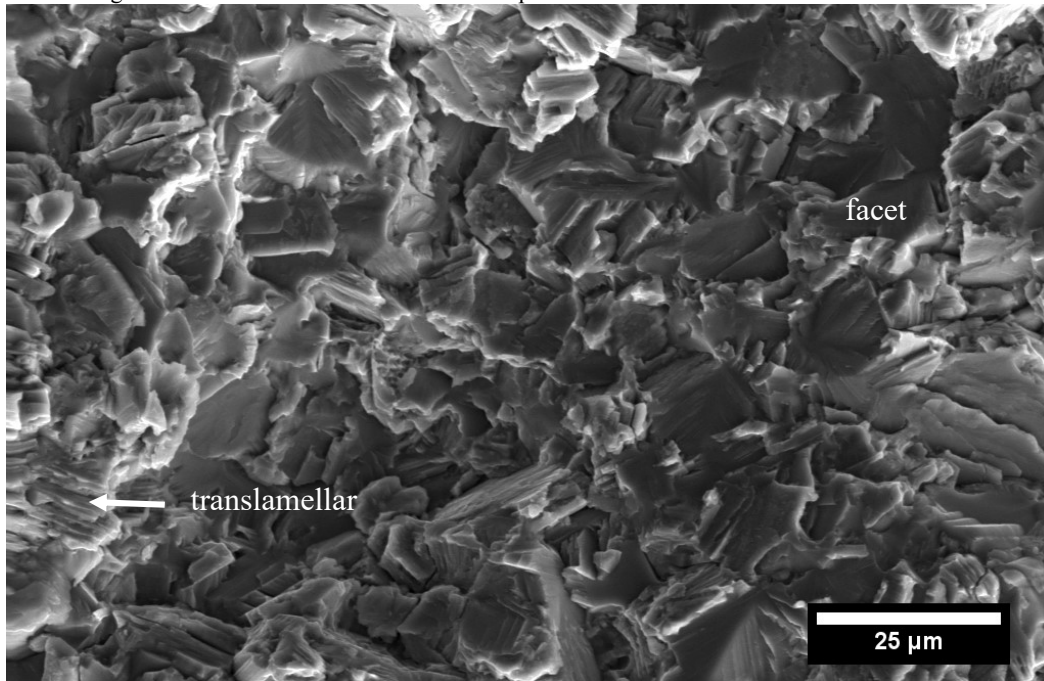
Representative fatigue crack SEM-SE fractography of upset-forged fatigue fracture features in the overload regime at  $R = 0.1$ . Crack direction is from top to bottom.
